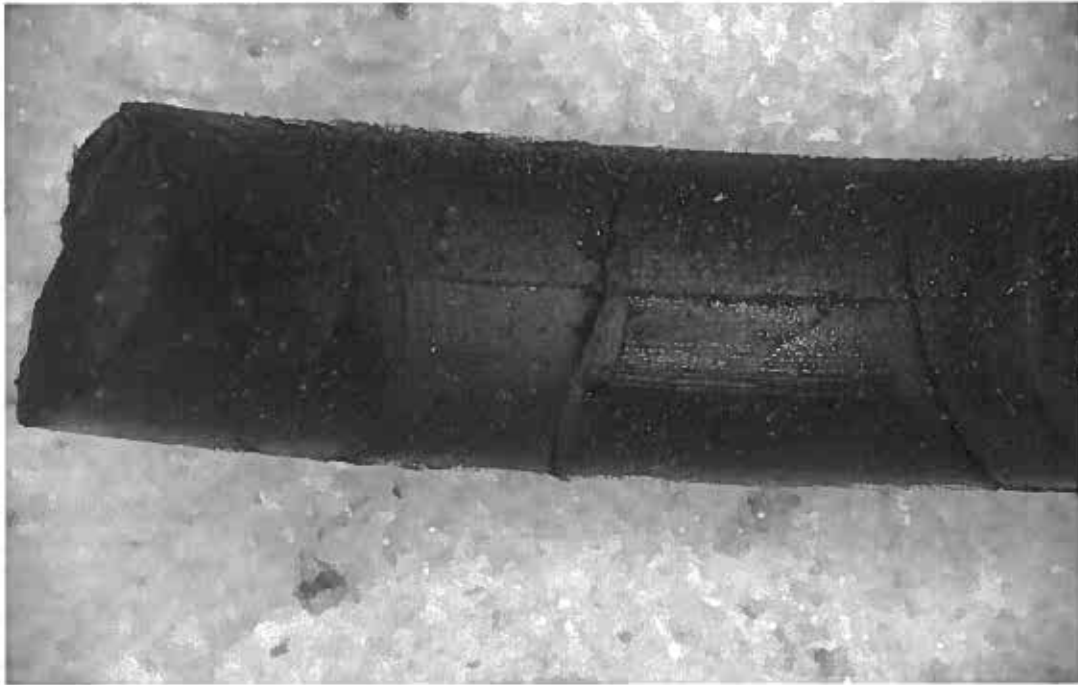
View of retrieved O-ring. Scale bar division is 1 mm.
